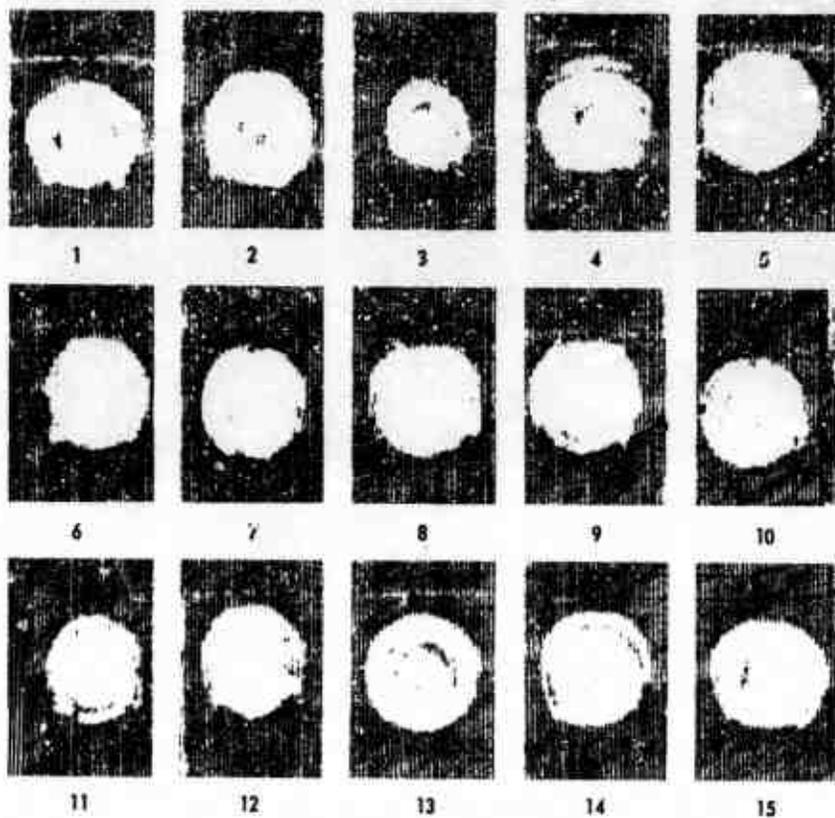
C-Scan Record of Series 2 Welds.
